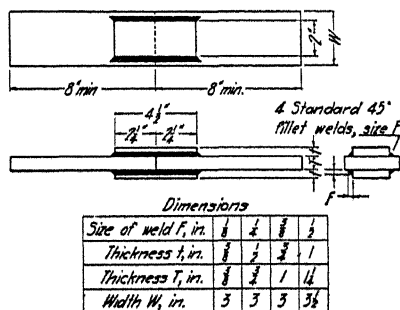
Longitudinal fillet-weld shearing specimen M after welding.
